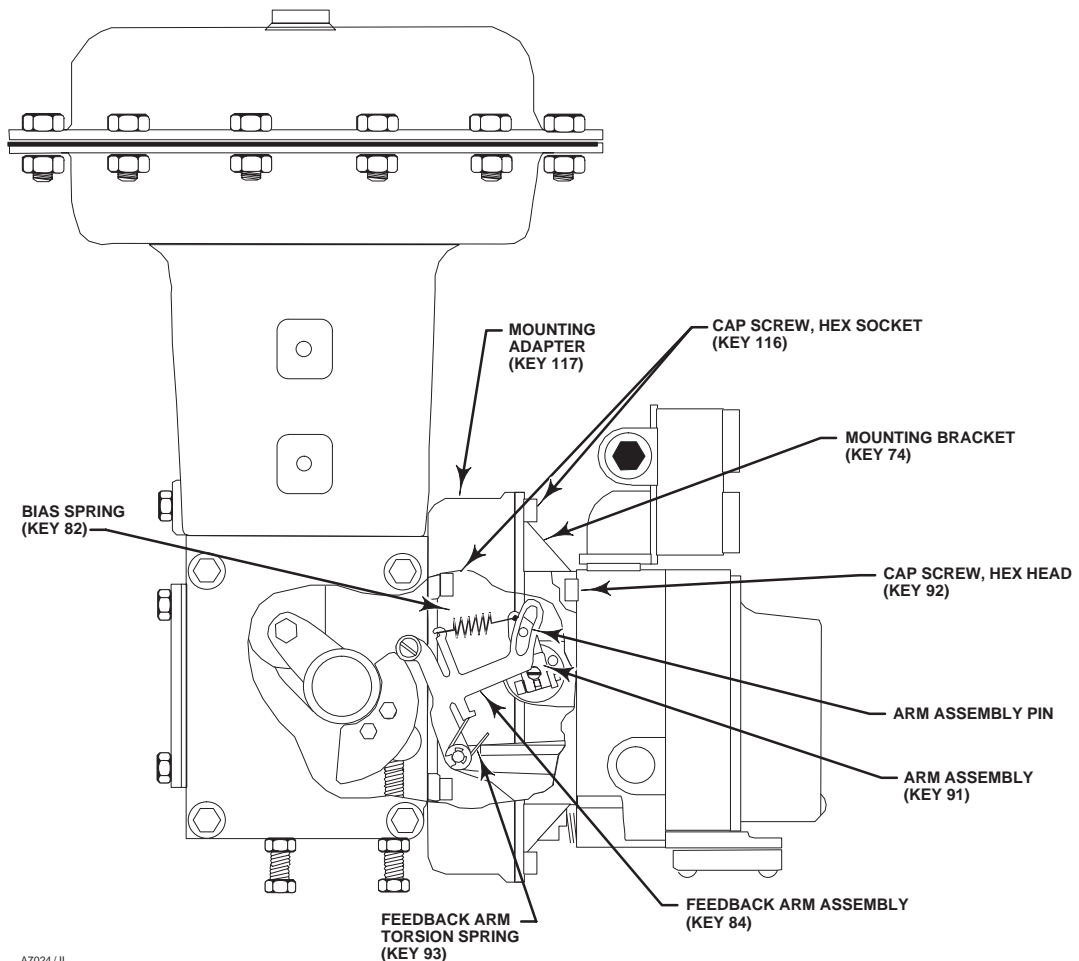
Type DVC5020 Digital Valve Controller Mounted on Type 1052, Size 33 Actuator
